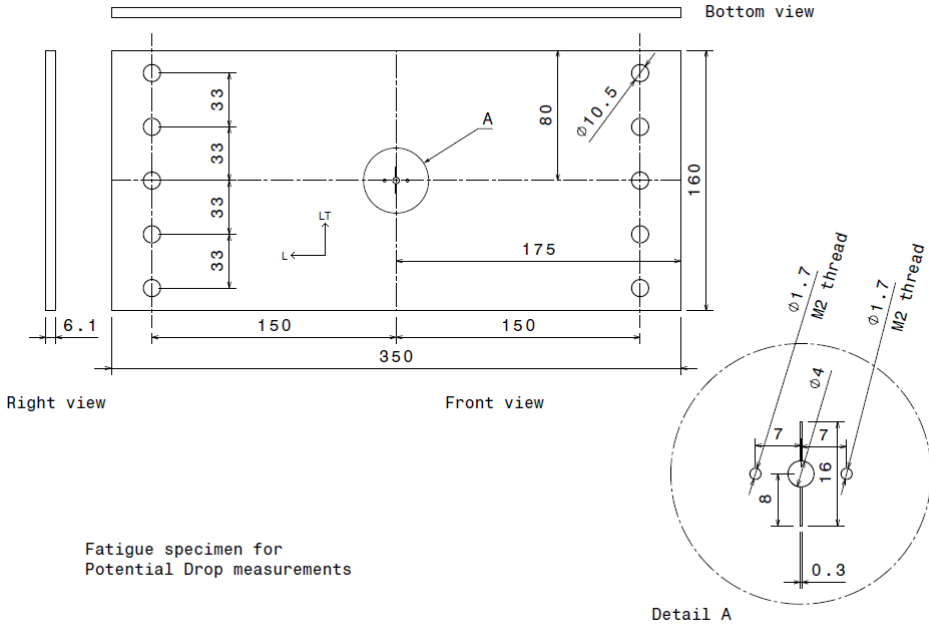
Drawing of a typical fatigue test specimen as used with the PD TTC setup. Loading direction horizontal. The constant current was connected through the edge holes on the horizontal centerline.
